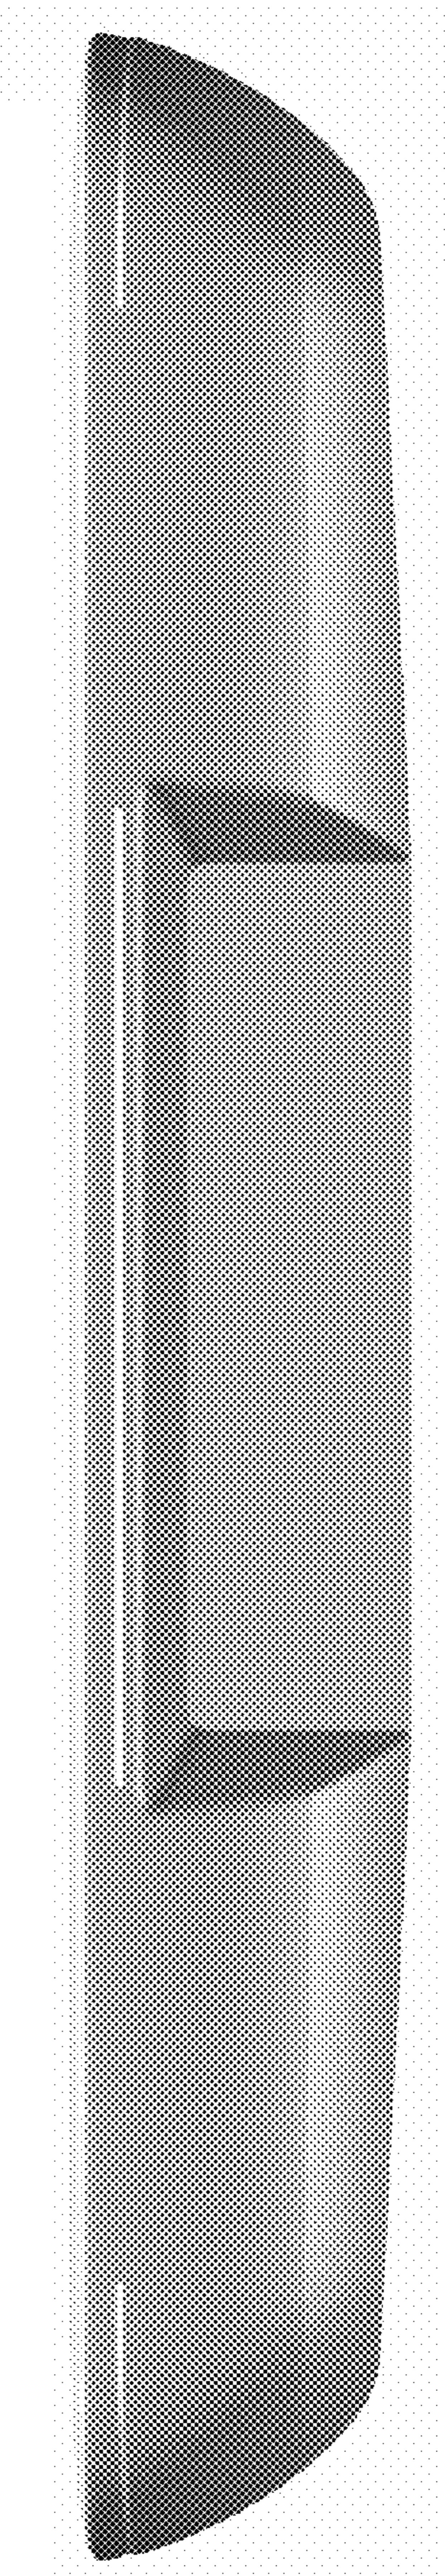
is a bottom plan view of the vehicle rear bumper cover;
